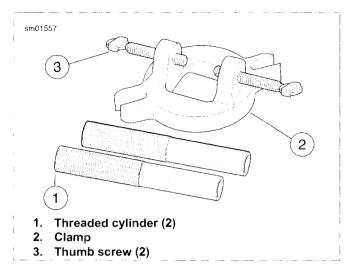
Connecting Rod Clamping Tool (Part No. HD-95952-33C)
